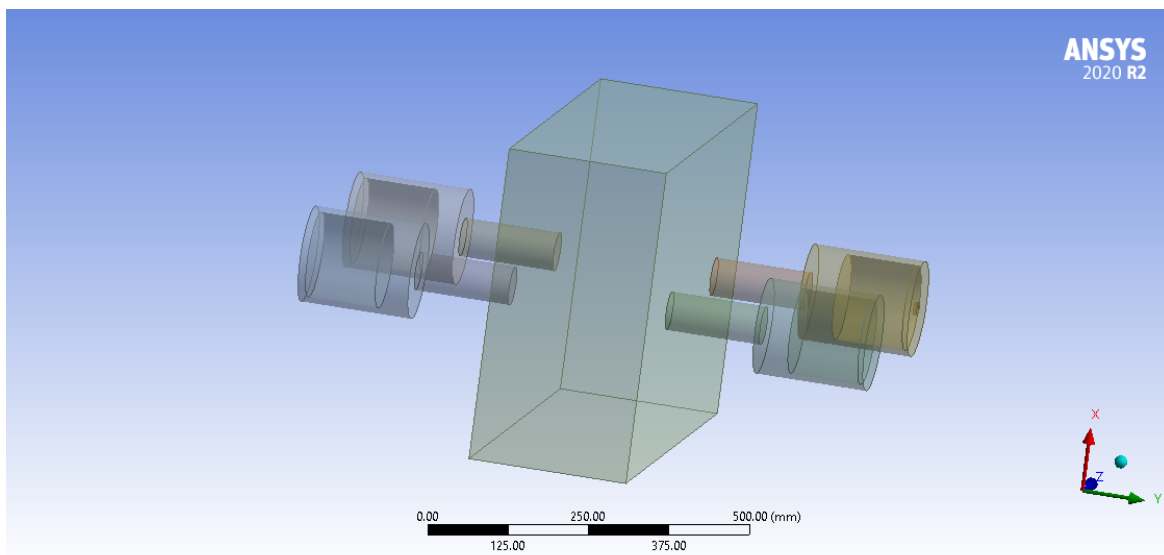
Engine CAD model in close-up view in DesignModeler.
